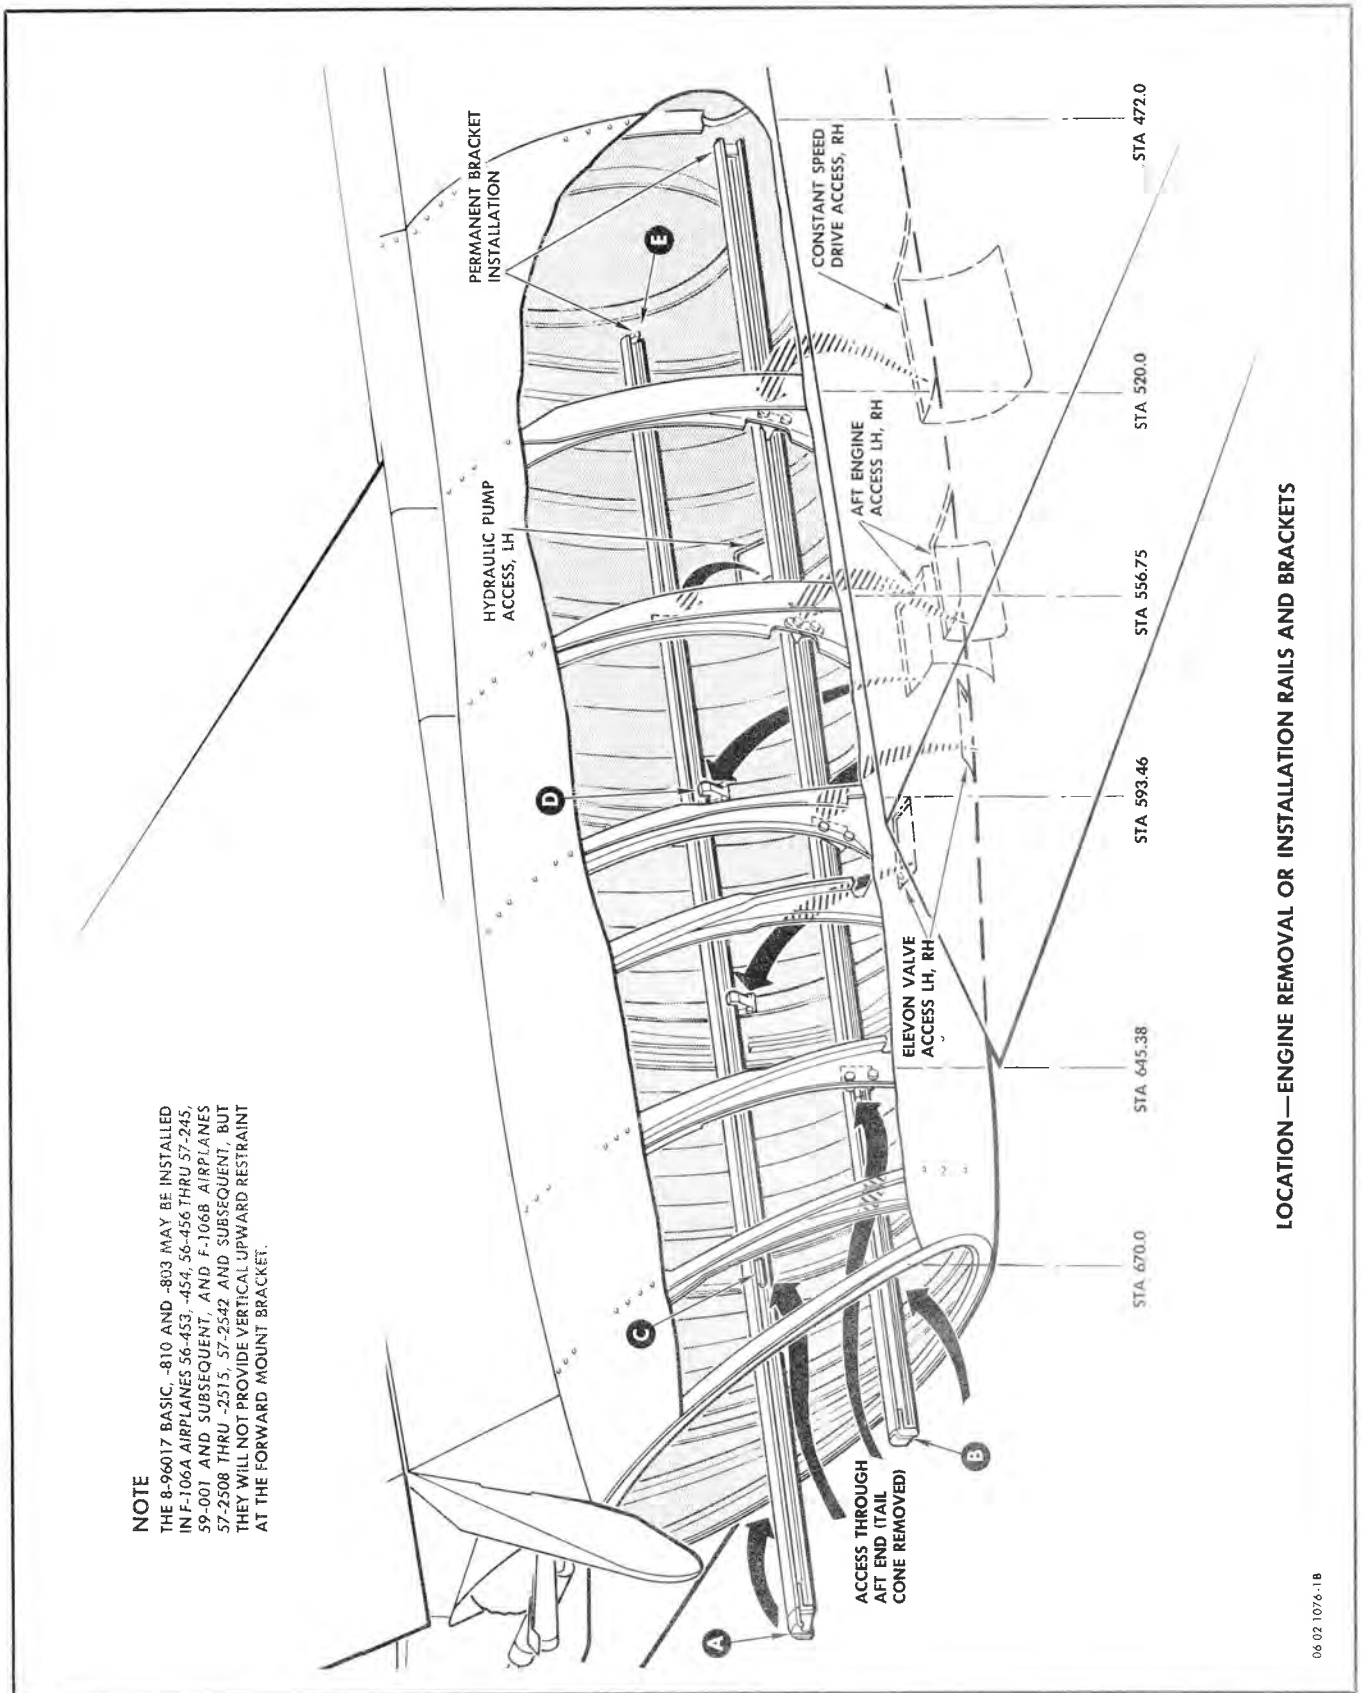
Engine Replacement, Rail and Bracket Installations, 8-96017-805 (Sheet 1 of 2)
